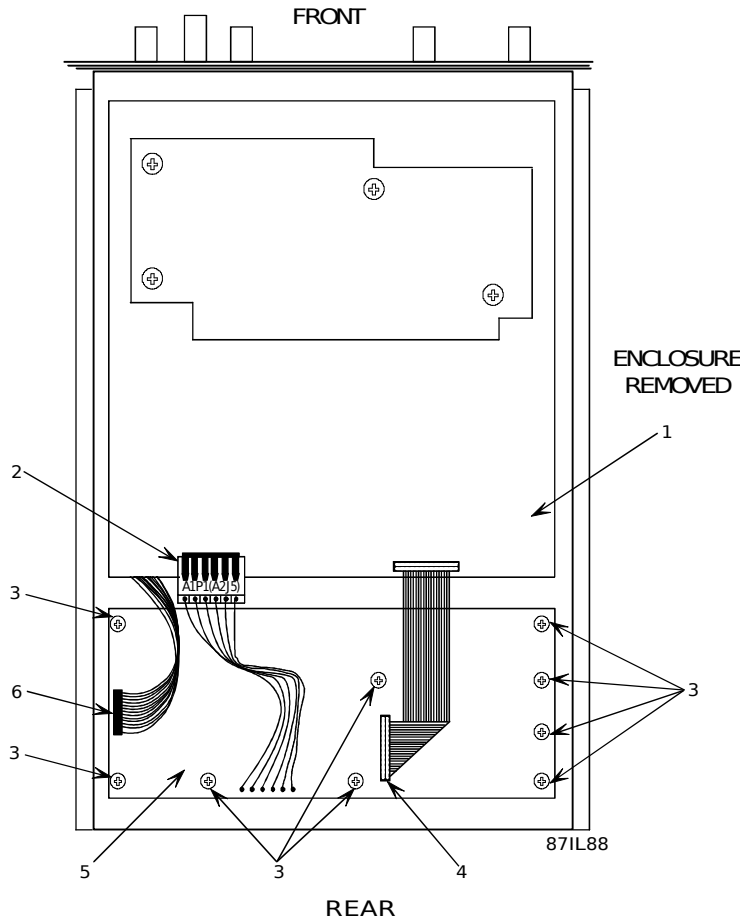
DC/DC Power Supply PC Assembly (A1) Remove and Replace Procedures
